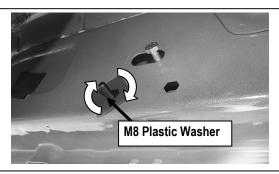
Thread (1) M8X1.25-30 Hex Bolt into the nut on the plate. (Stop when bolt reaches end of nut as pictured)
